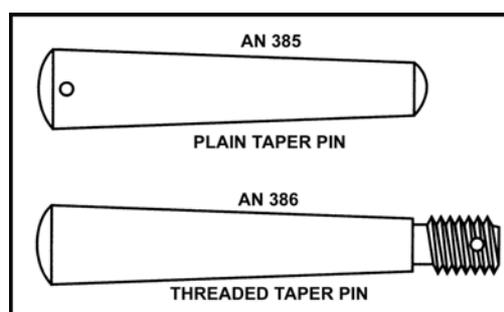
, Taper pins produce a tight fit in a reamed hole for applications loaded in shear.
